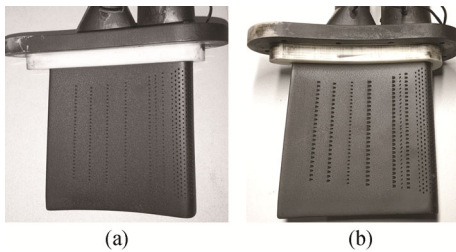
Picture of cylindrical hole (a) and shaped hole (b) film cooling vanes
